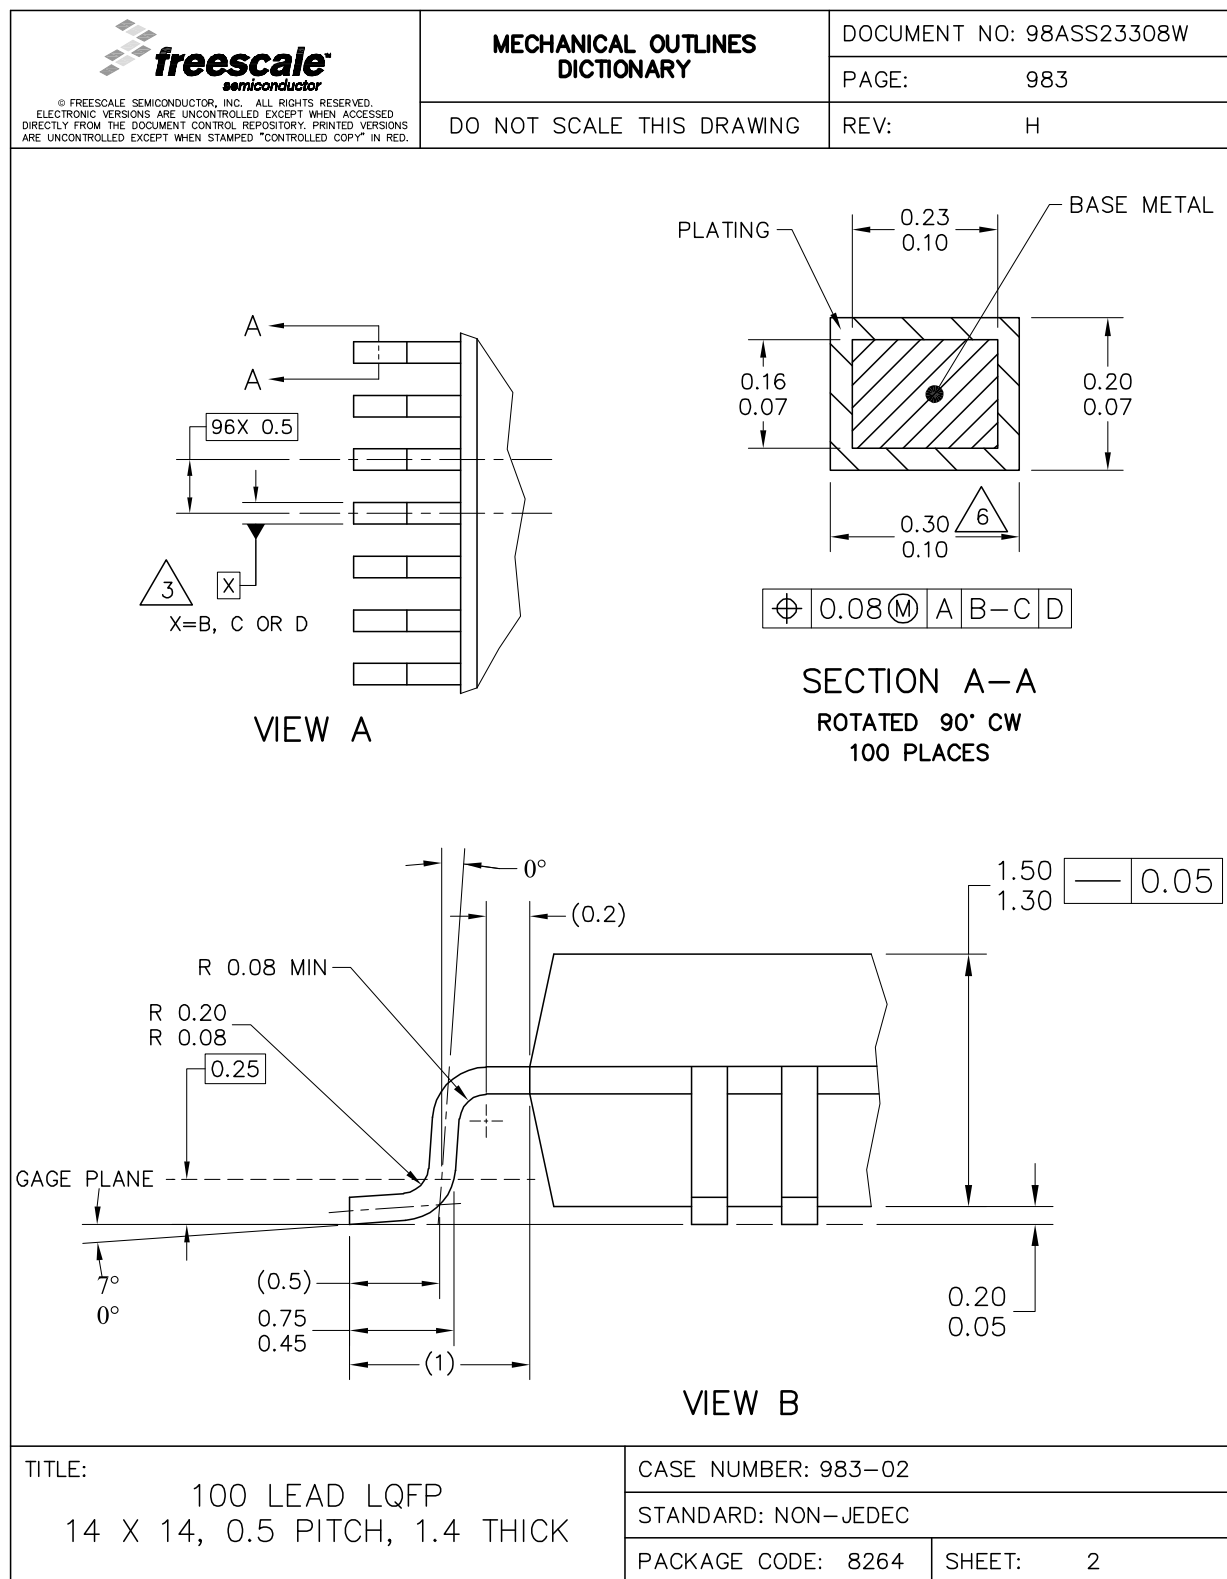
100 LQFP package mechanical drawing (2 of 3)
